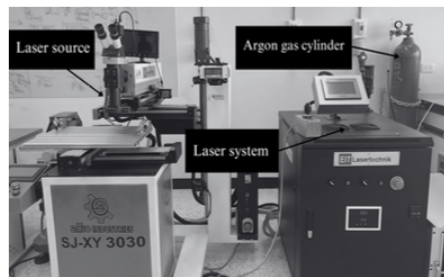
Experimental setup of Nd: YAG laser welding
